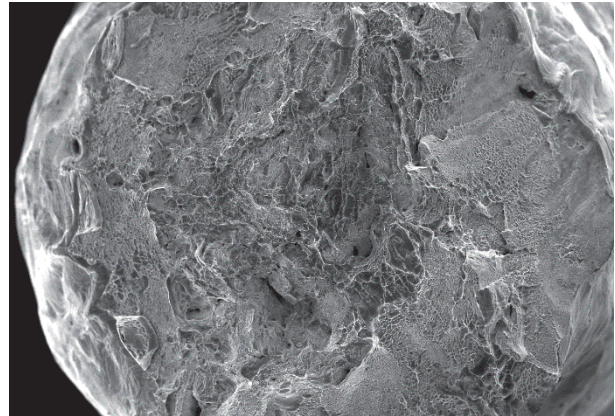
Fracture surface of the broken tensile specimen of as-cast TaNbHfZrTi alloy (right)
